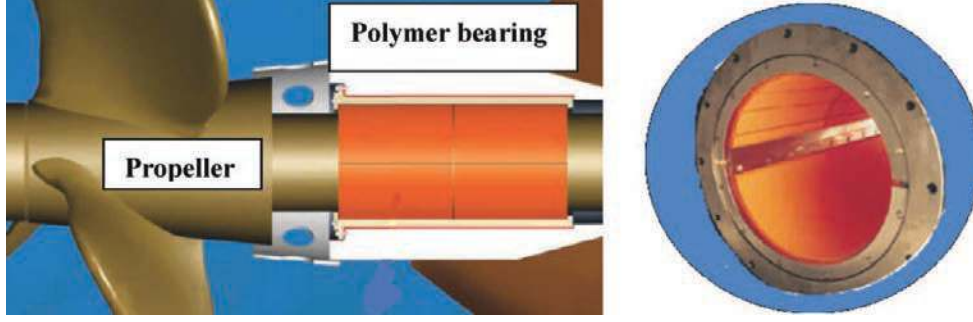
View of a typical water-lubricated propeller shaft bearing system.
